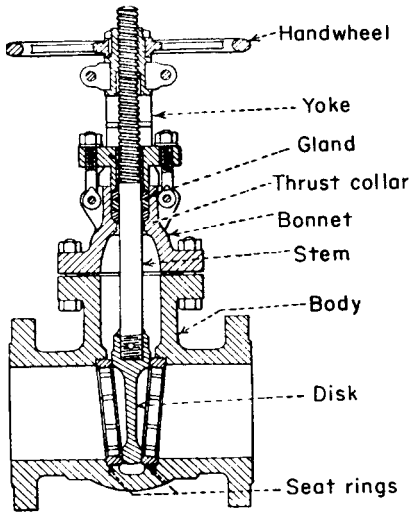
Rising-stem solid-wedge gate valve for 250-psig steam service.
